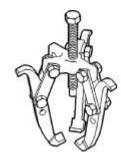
PULLER - 1023 Courtesy of CHRYSLER LLC
